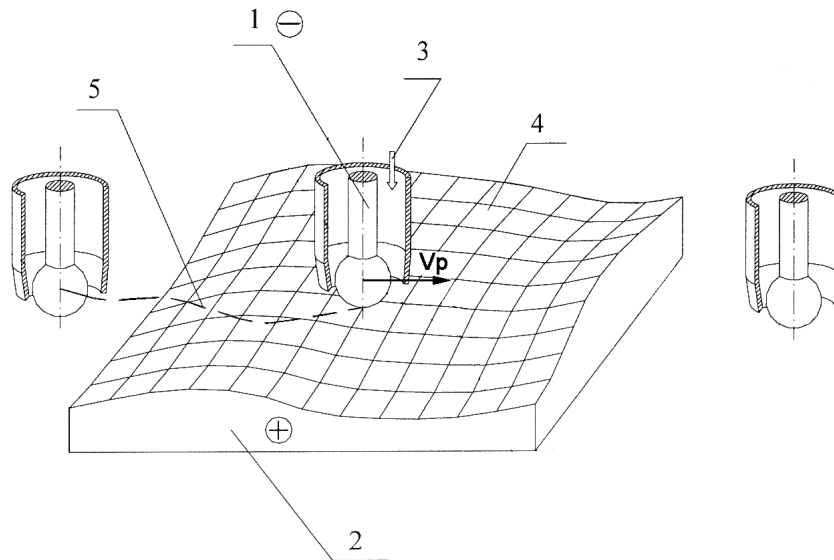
Scheme of ECM – CNC machining with spherical universal electrode tool: 1 – electrode tool, 2 – workpiece, 3 – electrolyte inlet, 4 – machining surface, 5 – electrode tool path, v_p - velocity of electrode displacement (feed rate) (5)
